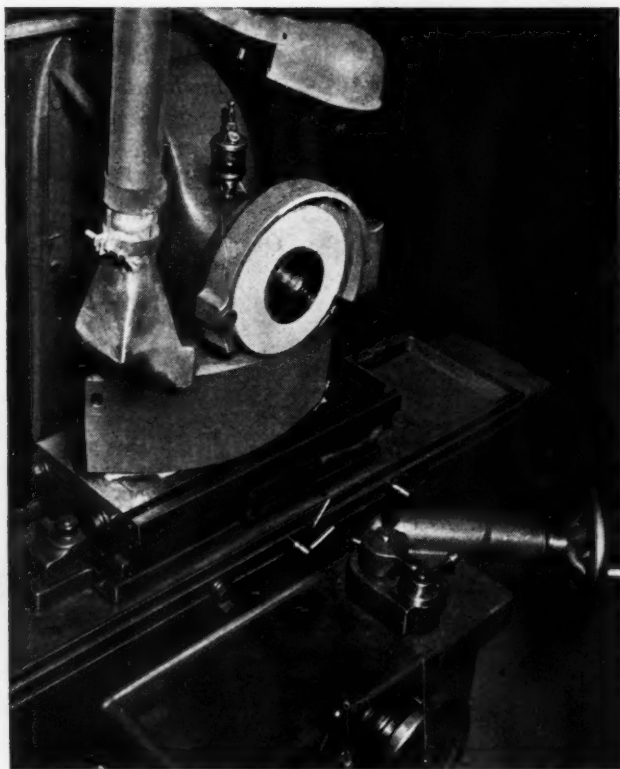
A Series 20 Wheel being Used to Grind a Cast-iron Machine Part. The Depth of Cut is 0.020 Inch
